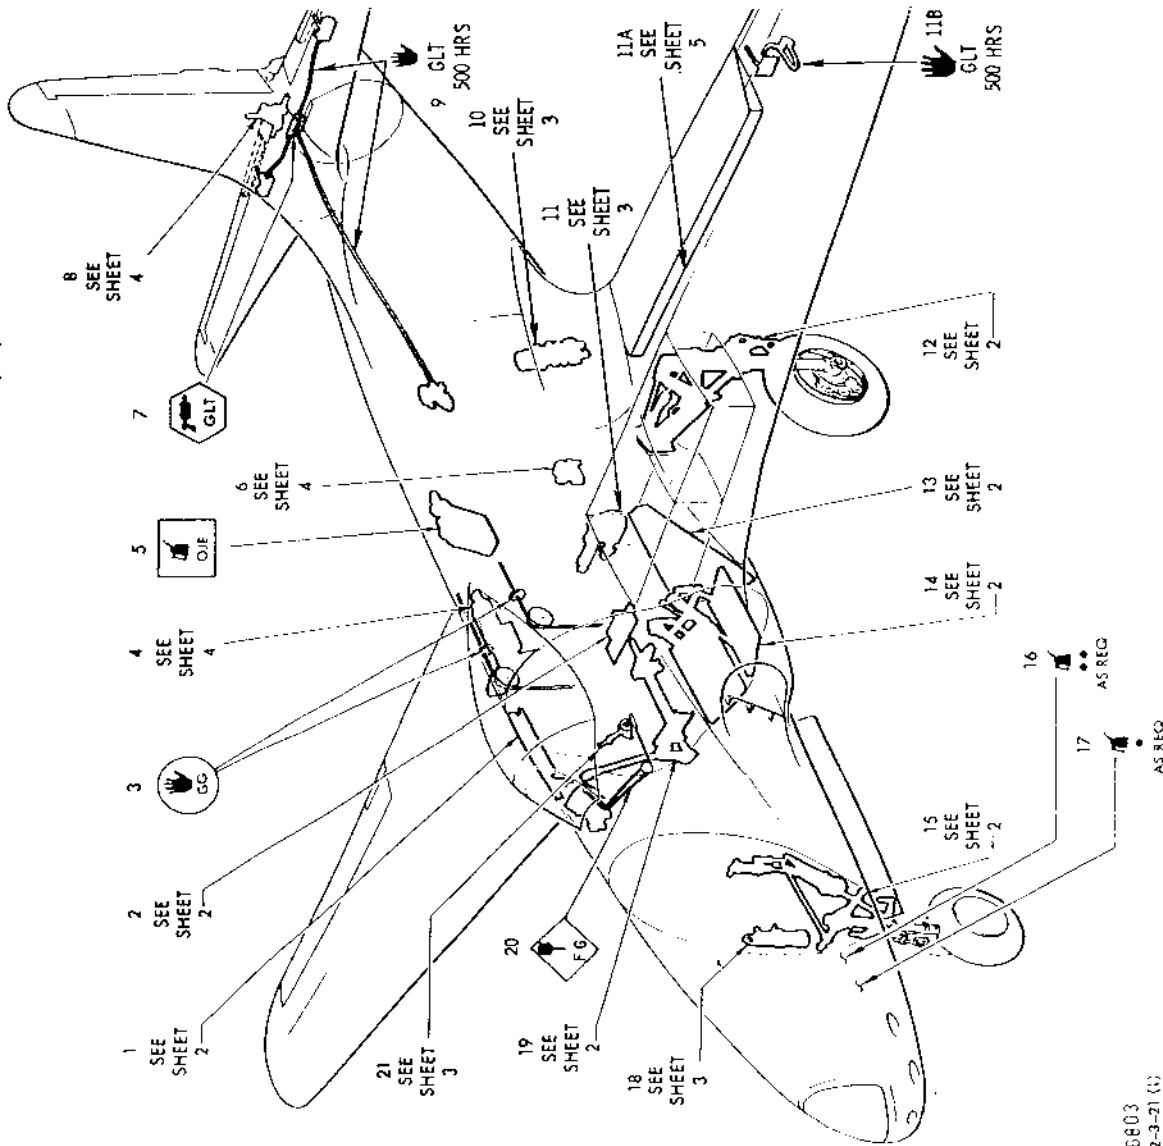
Lubrication Diagram (Sheet 1 of 5 Sheets)
